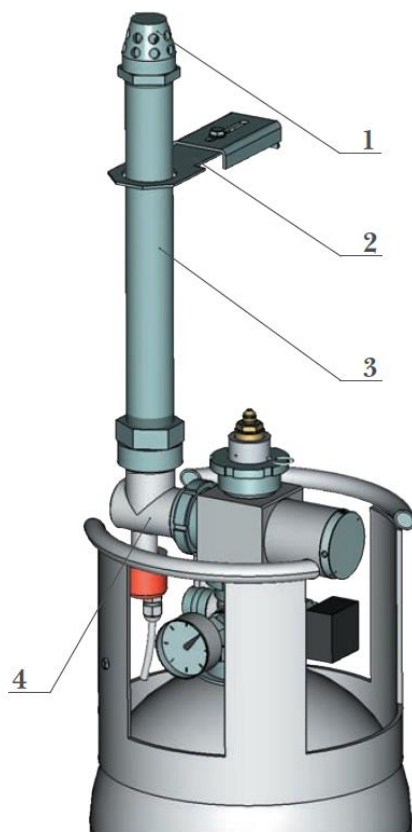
Overall view of release device YB on a module with a shut-off valve
